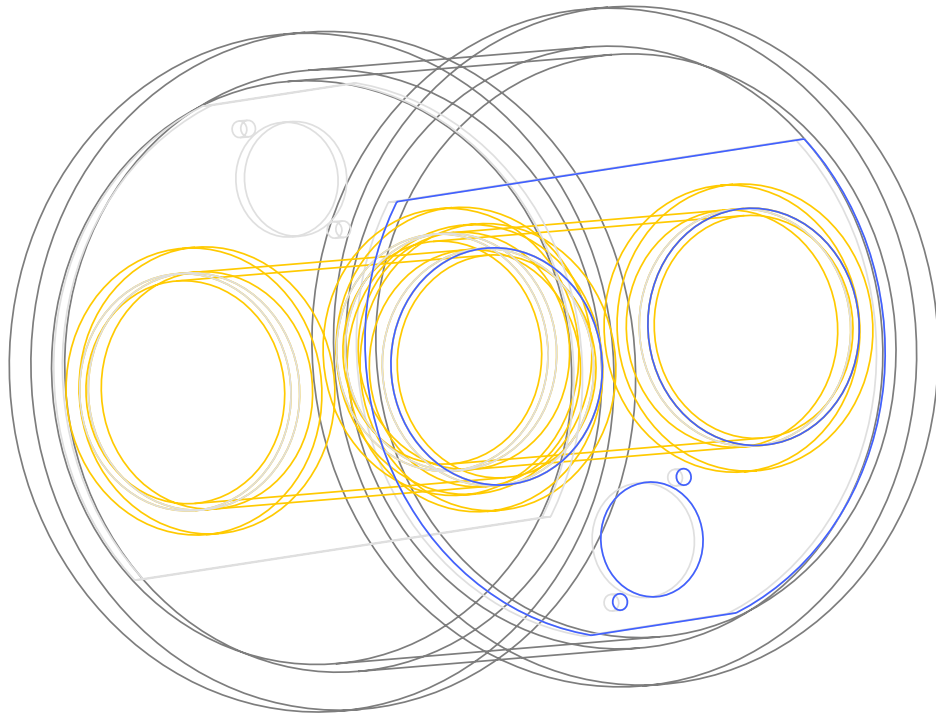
Coil assembly showing the sample coils in yellow and the laser cut mounting plates in blue as inserted into the larger outer tube representing the polarization coil.
